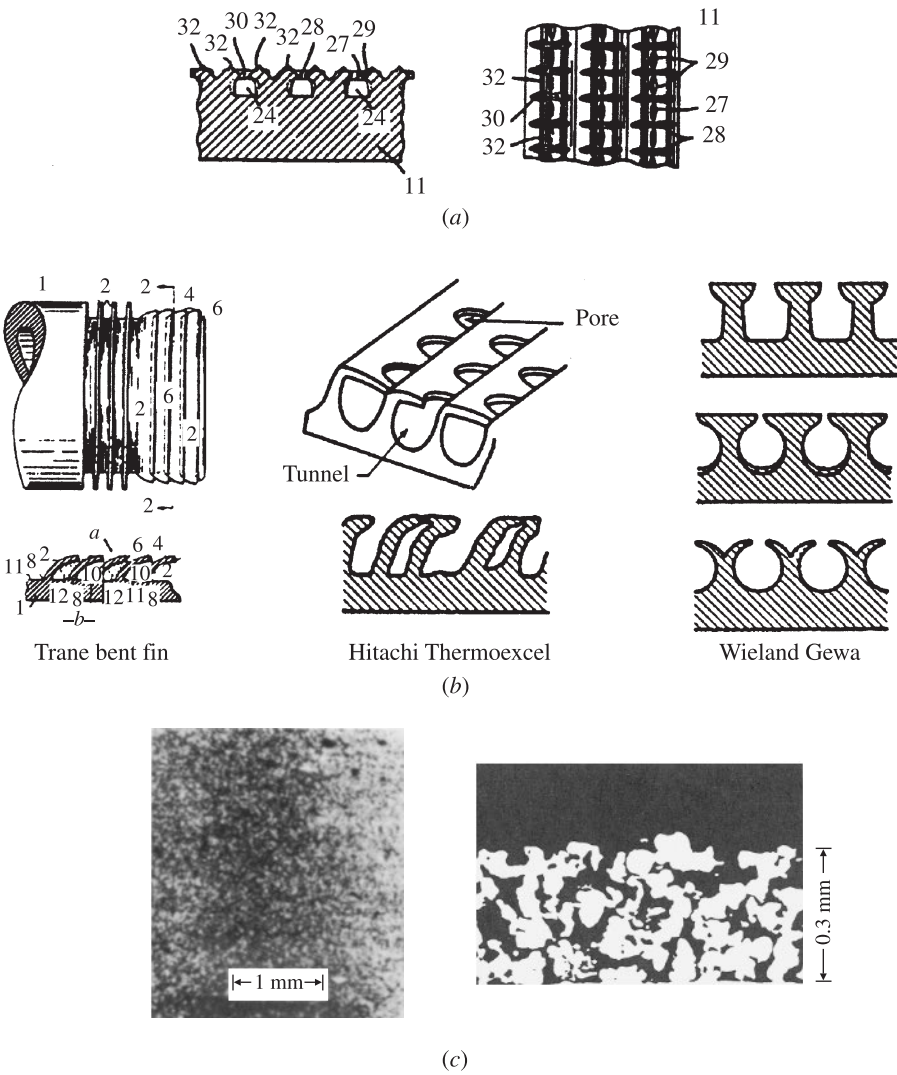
Examples of structured boiling surfaces produced by machining, forming, or coating: (a) deeply knurled surface; (b) different commercial formed-low-fin surfaces; (c) sintered particle-coated surface.
